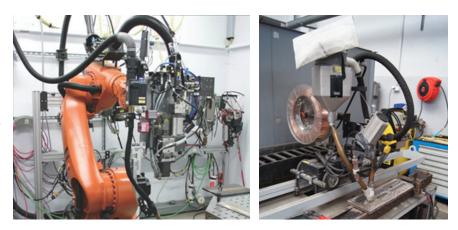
Robotic welding stations used in the tests at Łukasiewicz - Instytut Spawalnictwa: TruLaser Robot 5120 laser welding station provided with a TruDisk 12002 disk laser: a – main view, b – D70 hybrid welding head mounted on the industrial robot wrist, b) laboratory submerged arc welding station.
